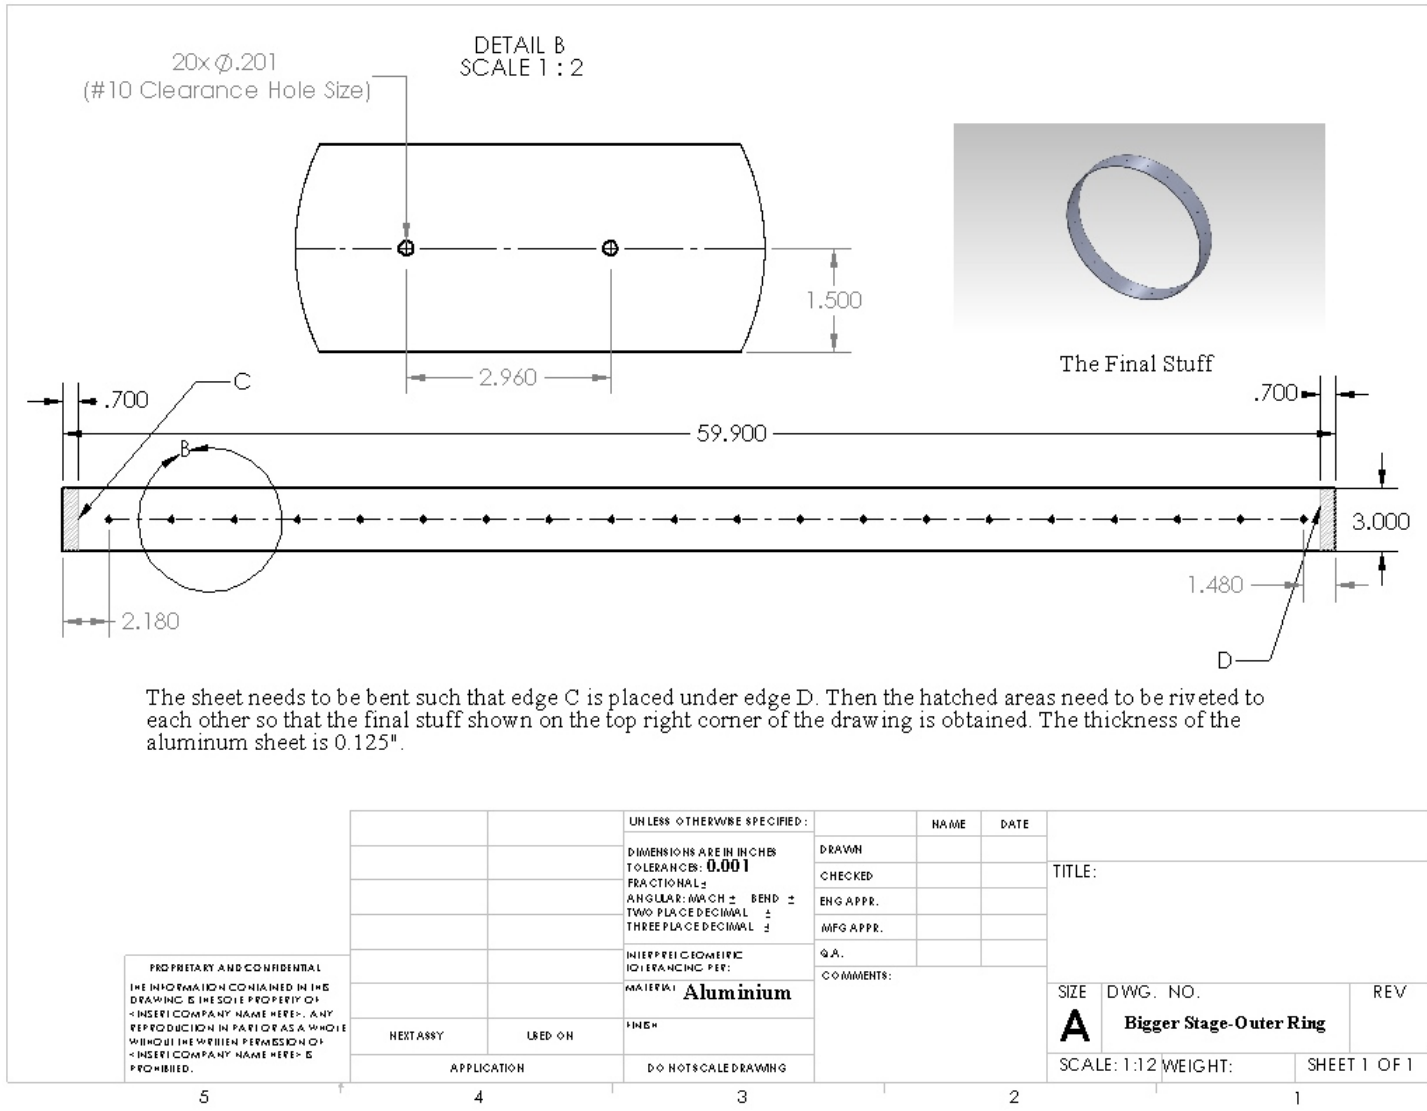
Engineering drawing for the outer ring of the bigger stage.
